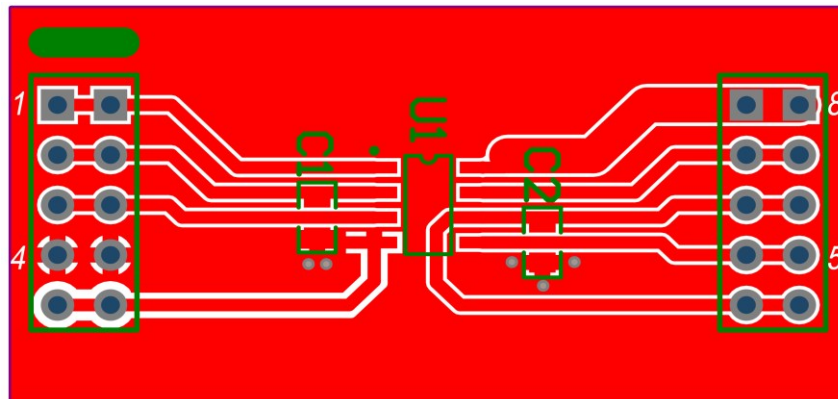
LT6657 Evaluation Board Layout (Top Layer)
